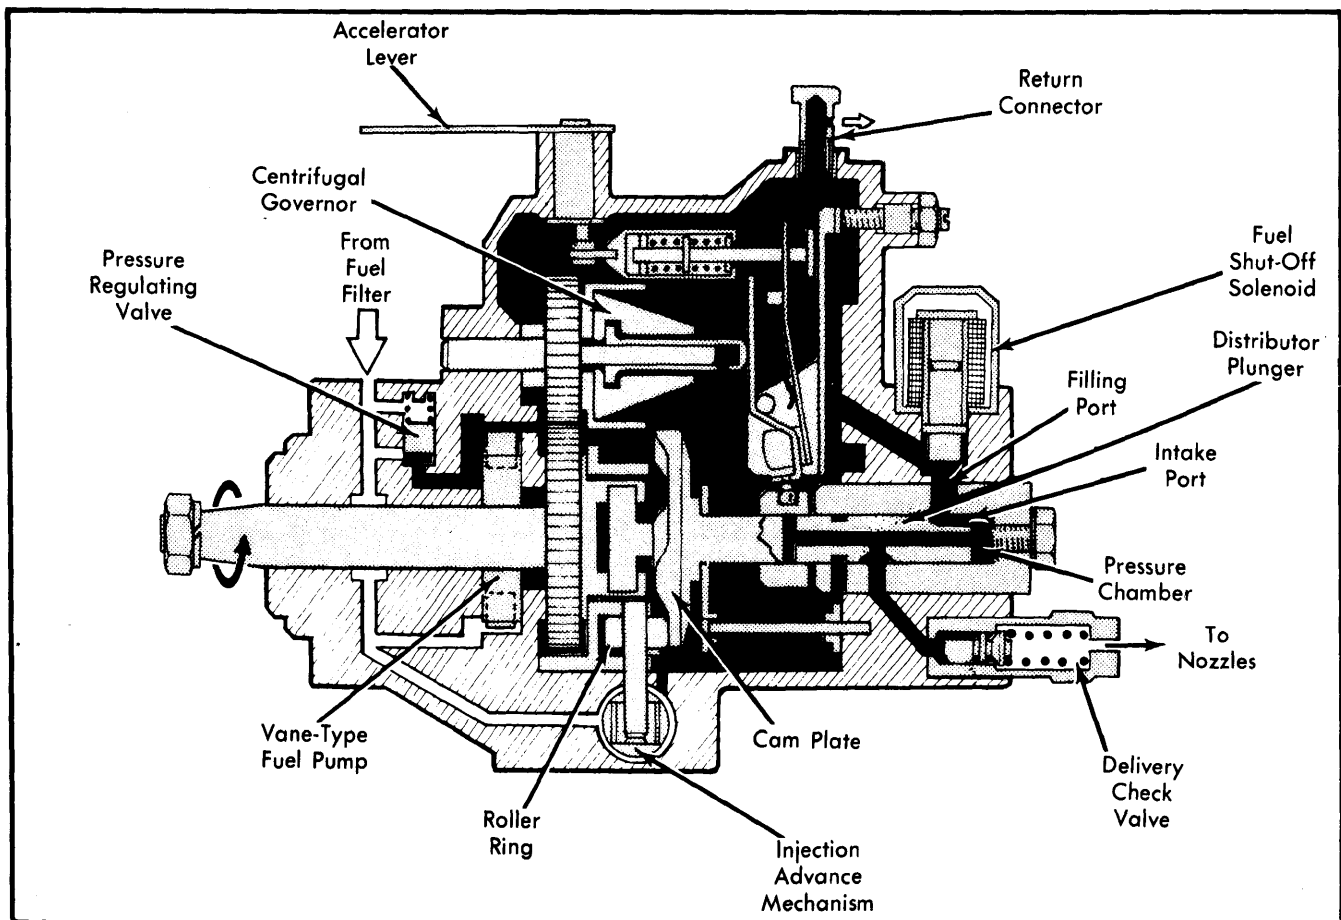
Cutaway View of Volvo Fuel Injection Pump
